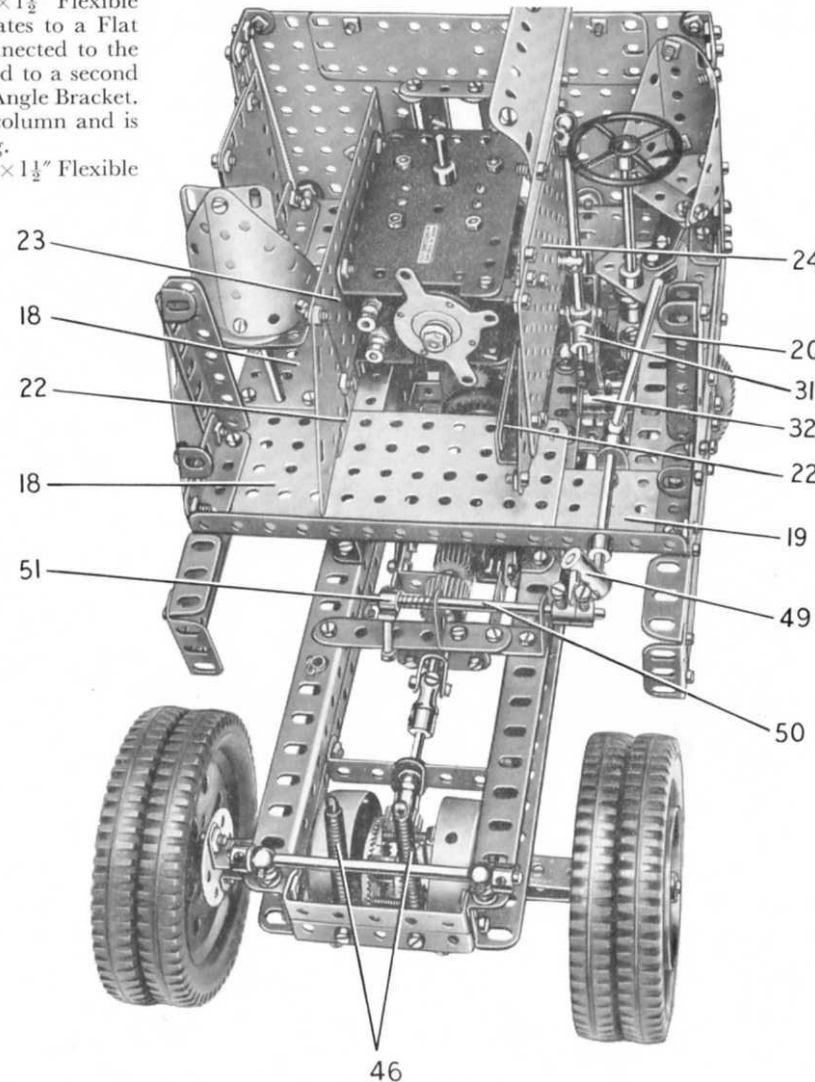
An end view of the Dumper Truck, with the hopper and the front of the body removed to show how the E15R Electric Motor is mounted in place
